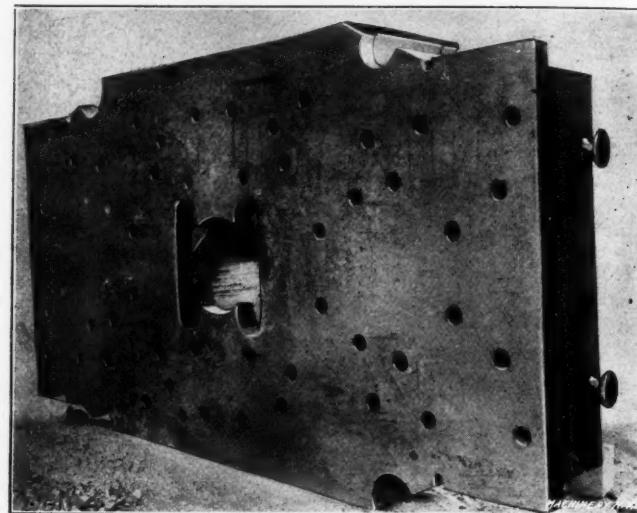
A Steel Casting Weighing 98,000 Pounds
